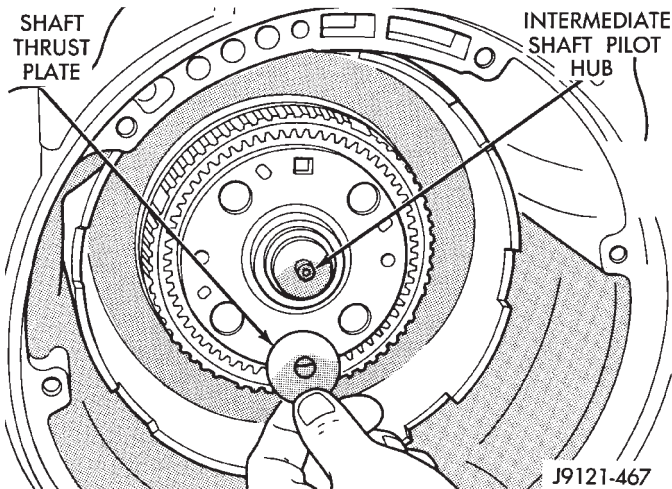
Installing Intermediate Shaft Thrust Plate—46RH
